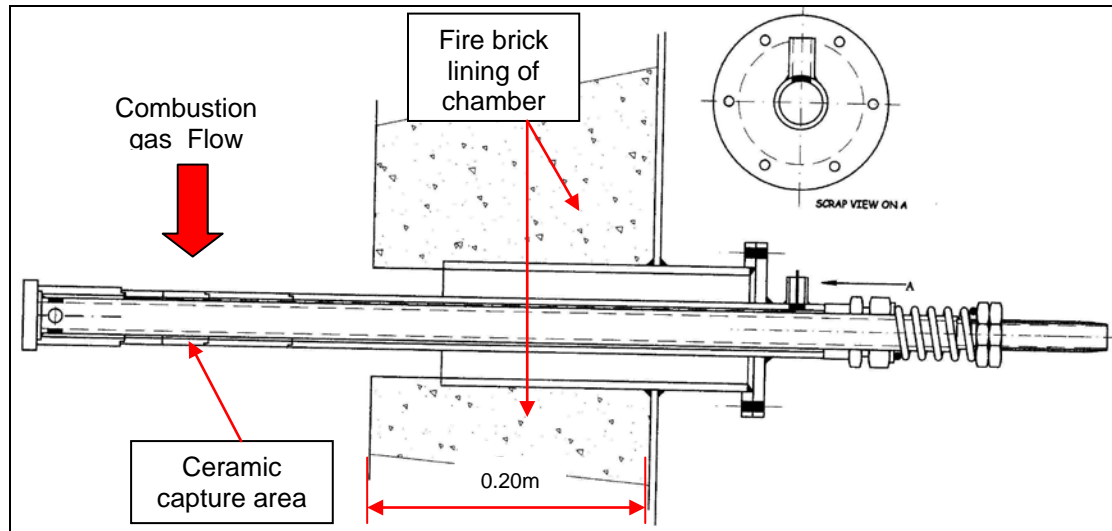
Section through view of deposit capture probe in the pulverised fuel combustion chamber
